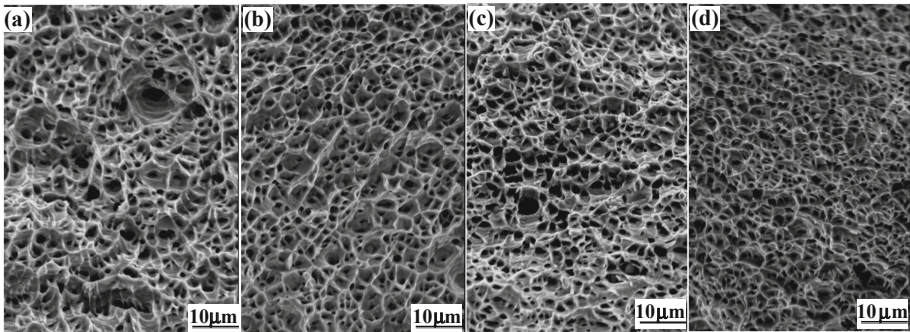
Fracture surface morphologies of joint tensile tested at: (a) RT, (b) 150 °C, (c) 240 °C, (d) 320 °C
